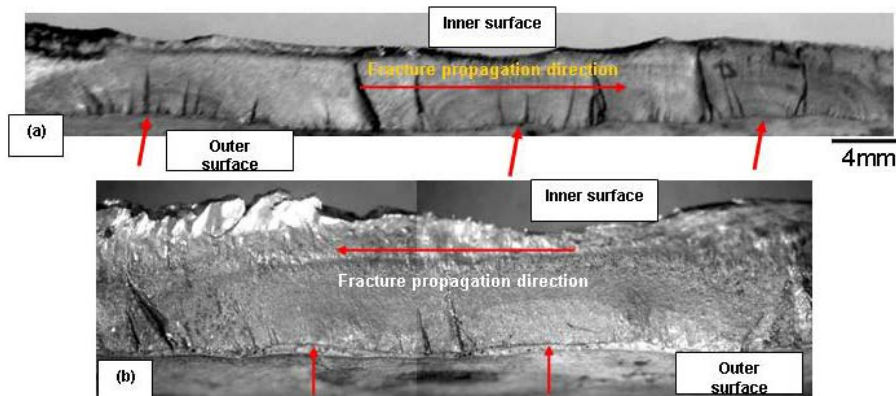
Low magnification photographs of fracture surface of 16" pipe side of spool. Crack initiation zones and fracture propagation directions are highlighted with arrows. Note beach marks at crack suspected initiation zones.
